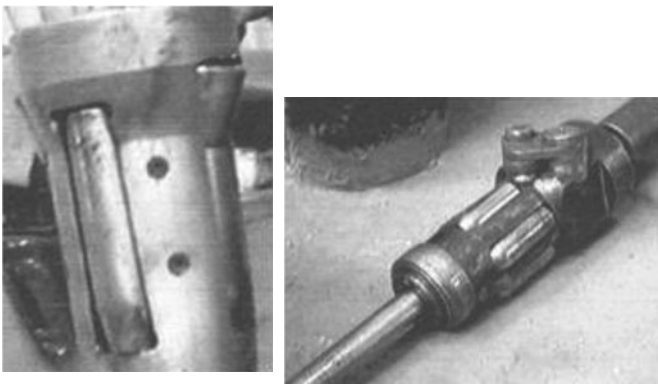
(a). Tube roller with flare. Figure 6-11(b). Tube roller beading attachment.
